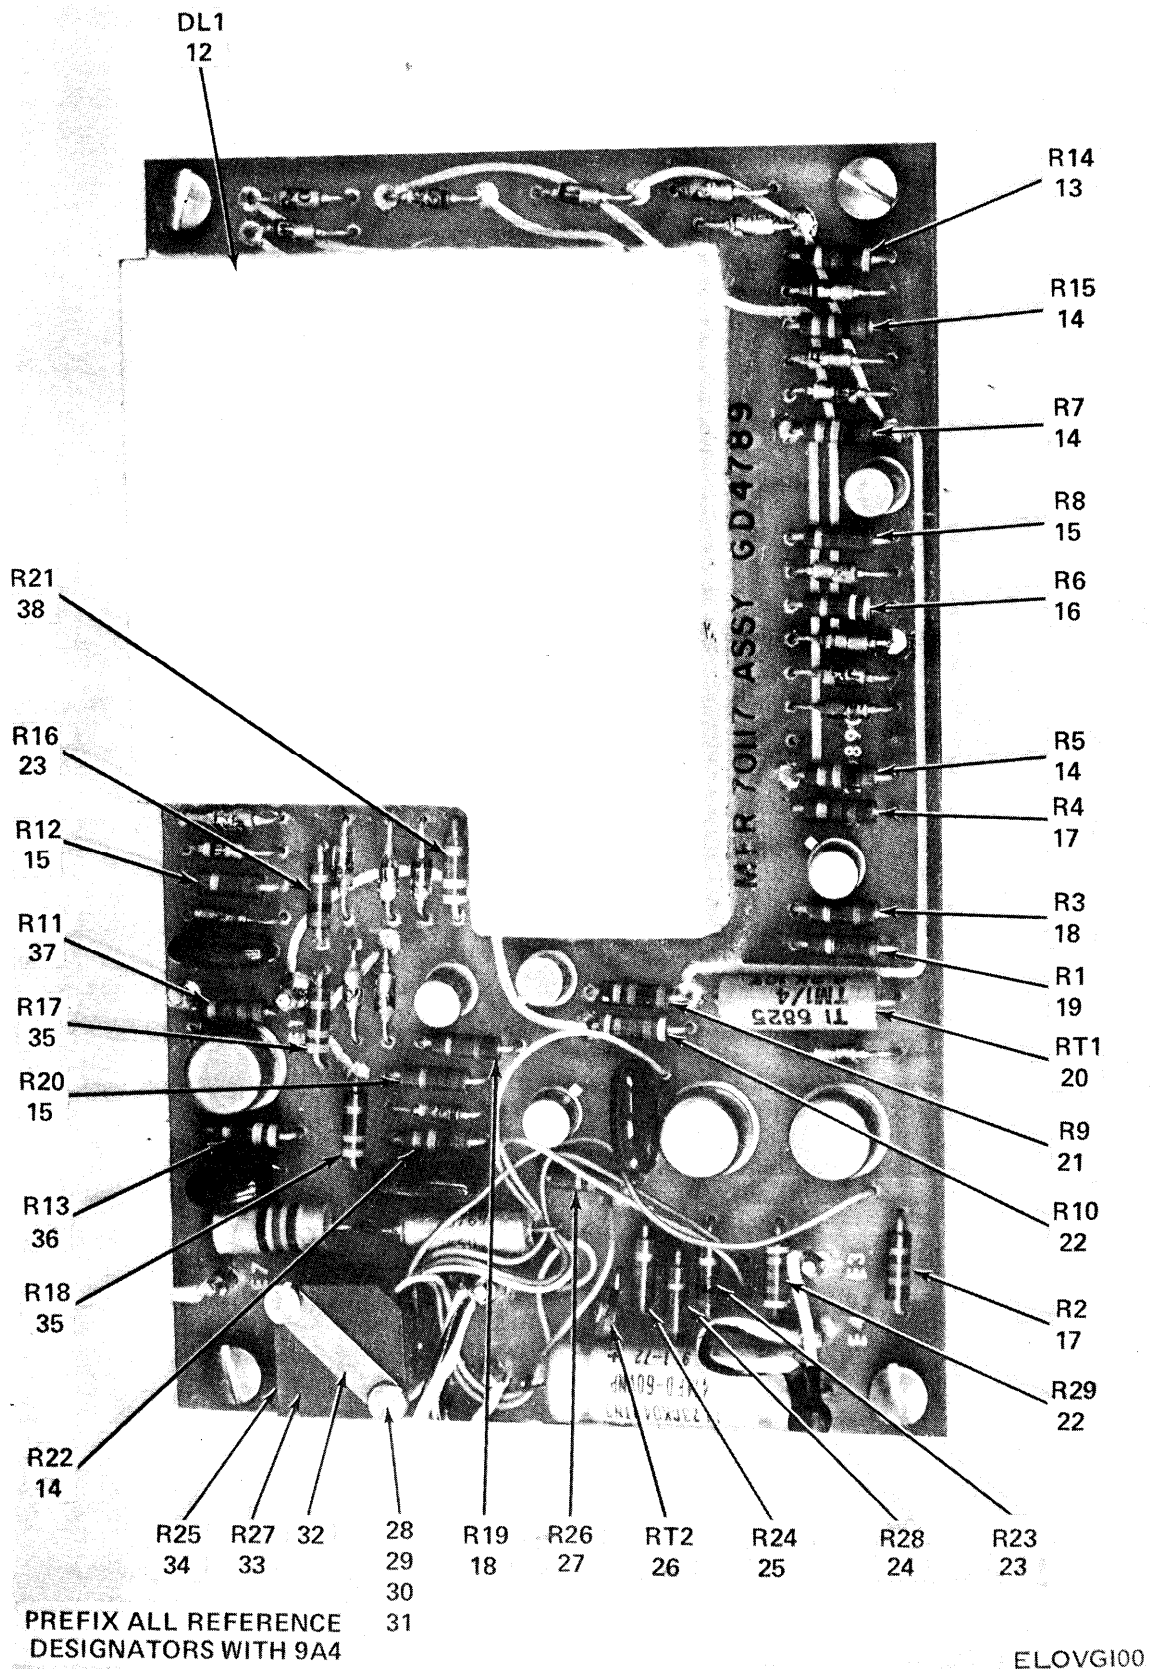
© Calibrate control assembly (sheet 2 of 2).
